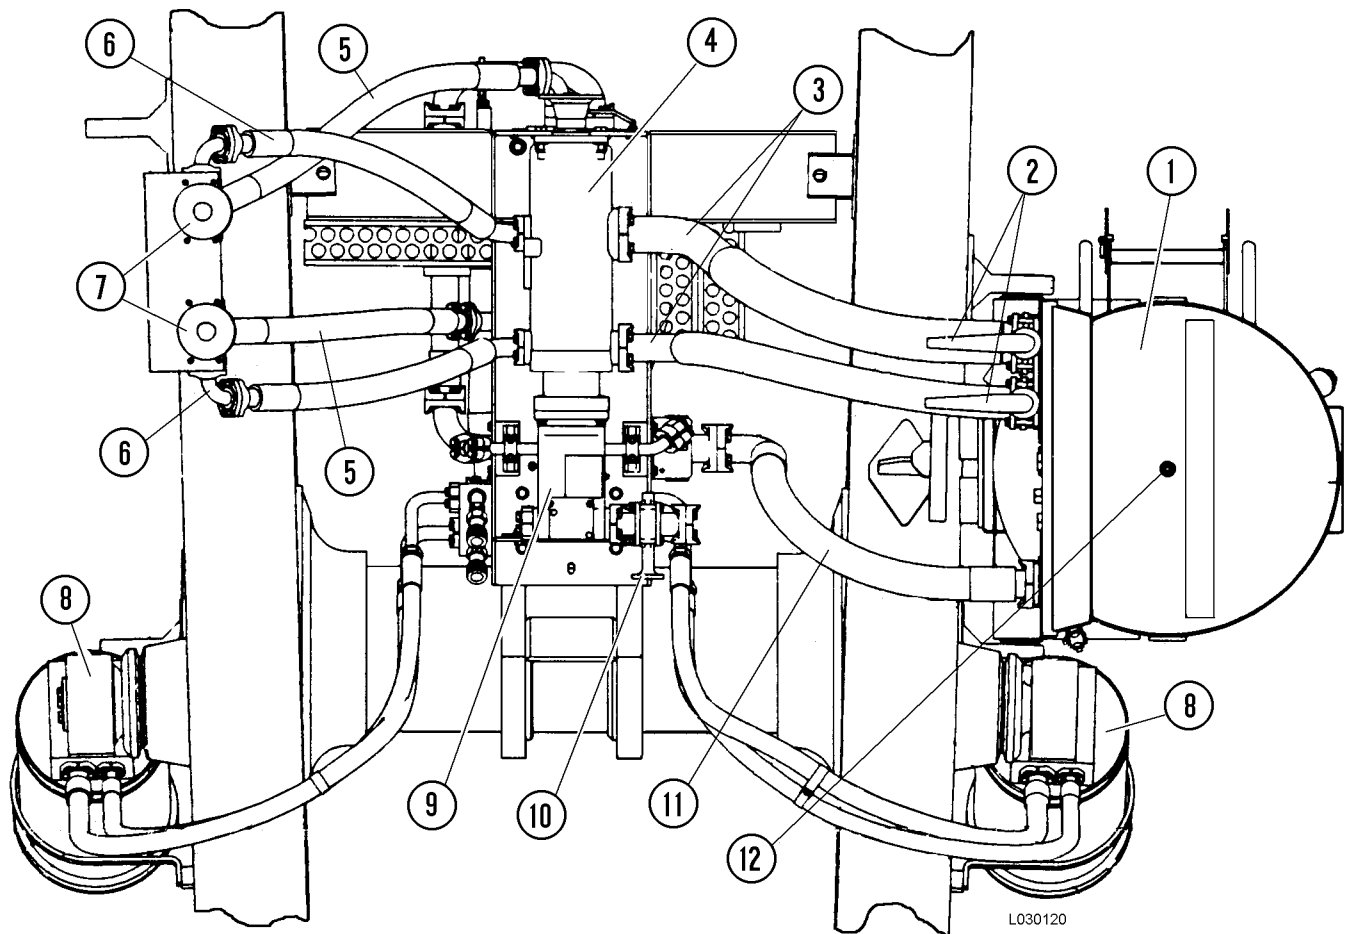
HOIST PUMP PIPING (BOTTOM VIEW)
